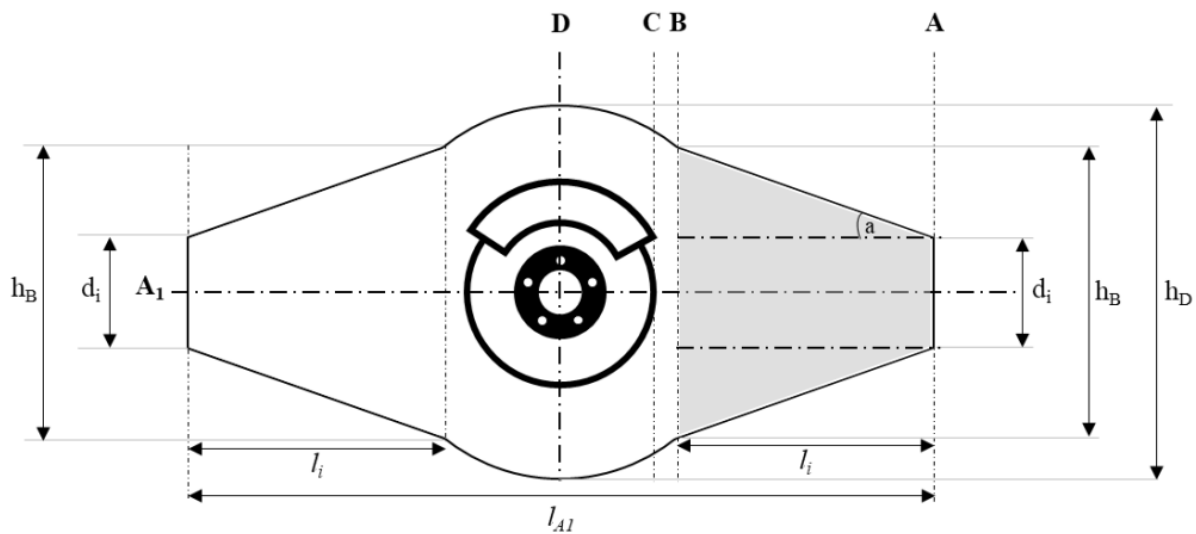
Shape of the brake enclosure and its main dimensions [6]
